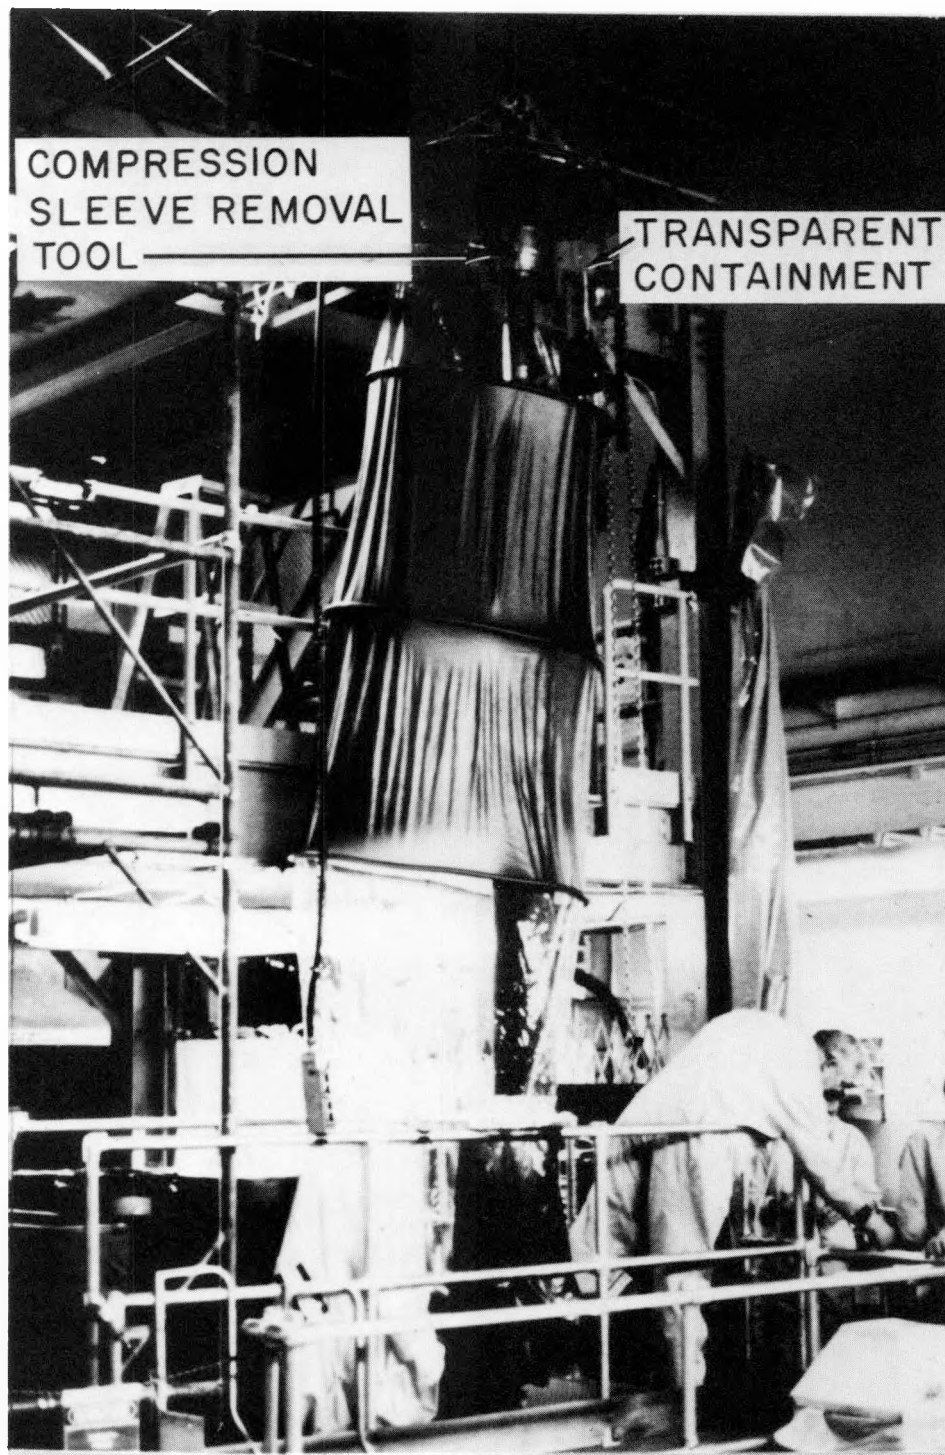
Containment Assembly for Compression Sleeve Removal (Shown During Checkout on Mock-ups)
